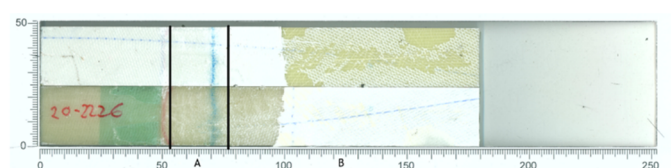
Example of a fracture surface after testing with a D-AM PC/PC ENF specimen (specimen number 20-2226).
